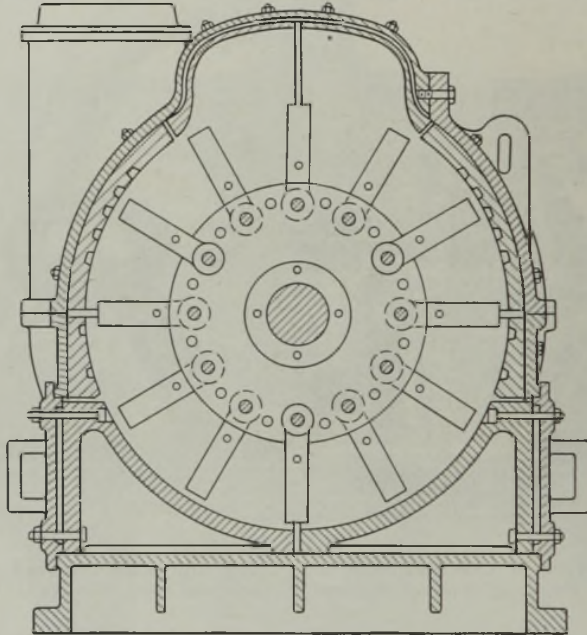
Section through C-E Raymond impact mill showing arrangement of rotor with swinging hammers.
